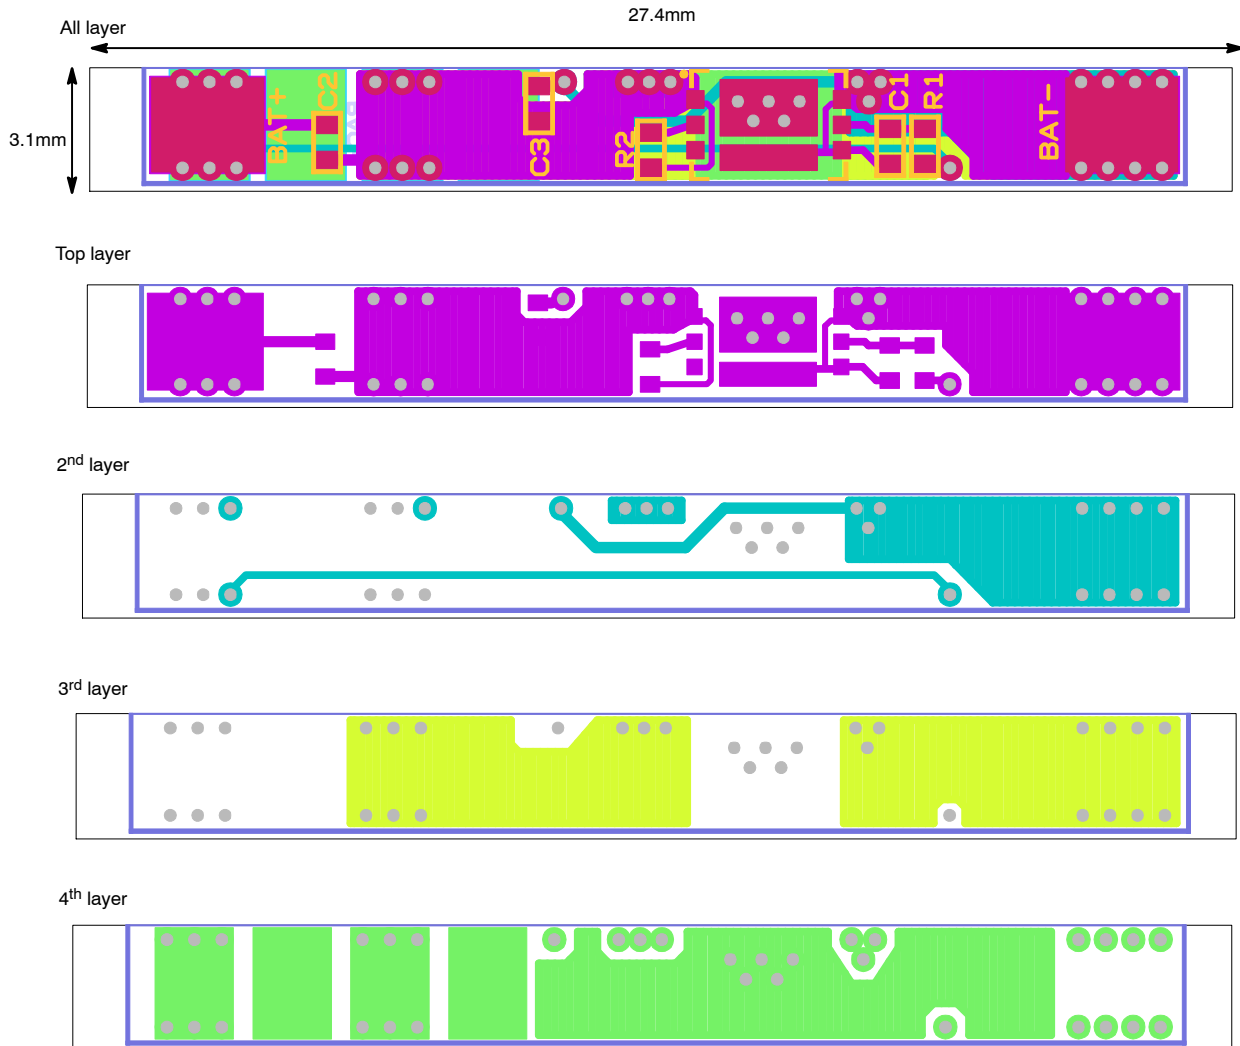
Board size L = 27.4 mm W = 3.1 mm H = 0.8 mm glass-epoxy 4 layers
